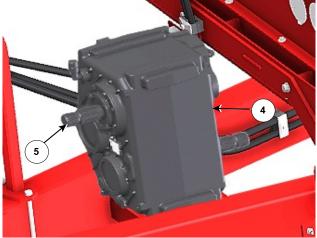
Place the Gearbox onto the Base Plate^{224294C}
